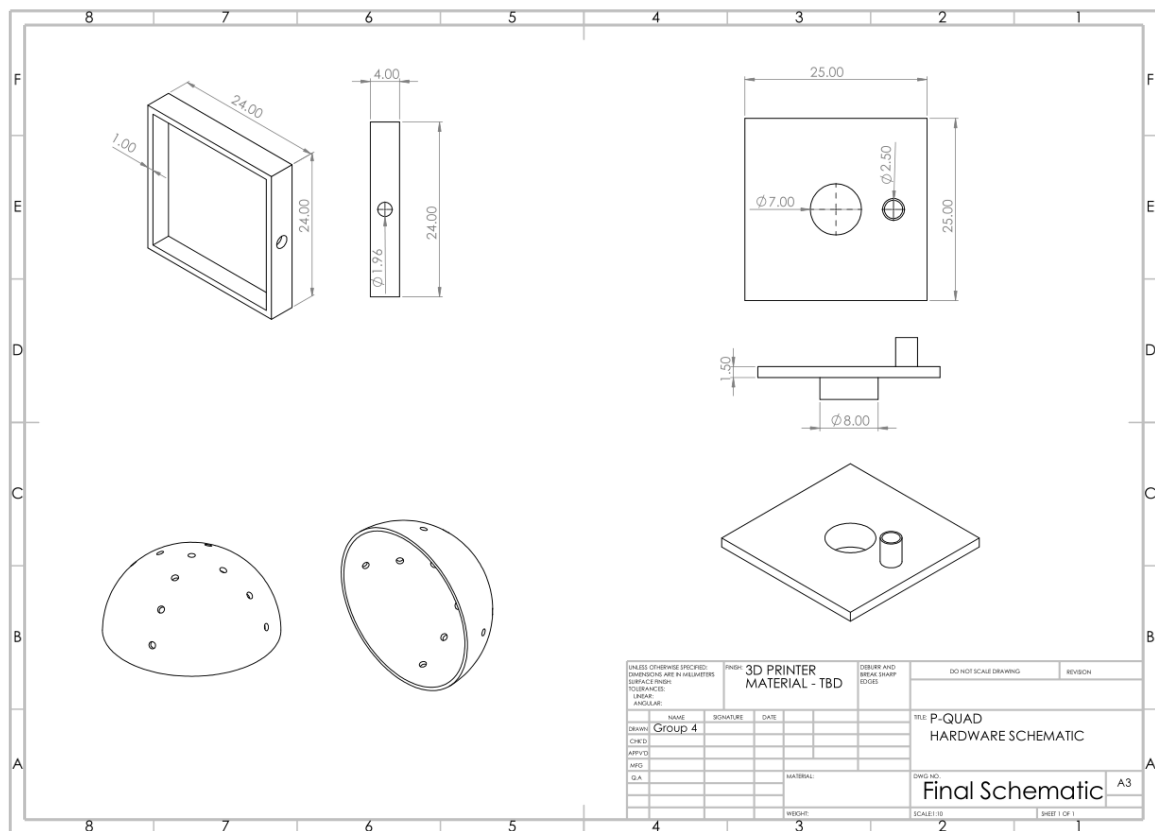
and b: A - Enclosure Housing Design B- Fabricated base Design
